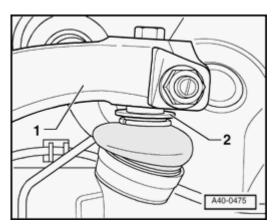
Identifying Steering Arm & Tie Rod Ball Joint Sealing Washer Courtesy of VOLKSWAGEN UNITED STATES, INC.
